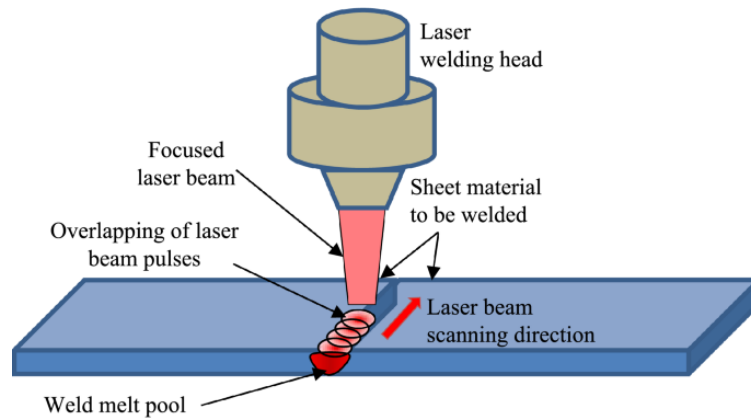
Basic laser welding apparatus of a butt joint [14]
